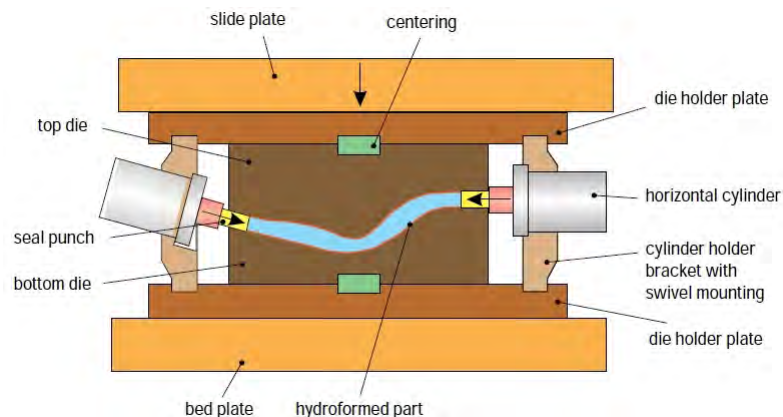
Schematic showing tube hydroforming die (Courtesy Schuler (Metal Forming Handbook 1998))
